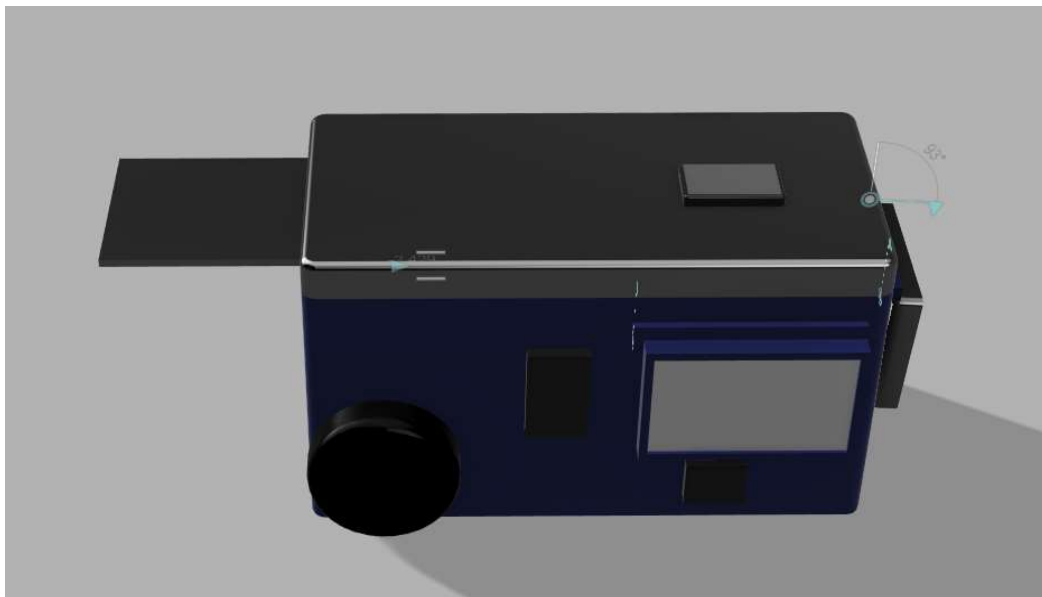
Smart Cooler Back View Cutting Board Extended
